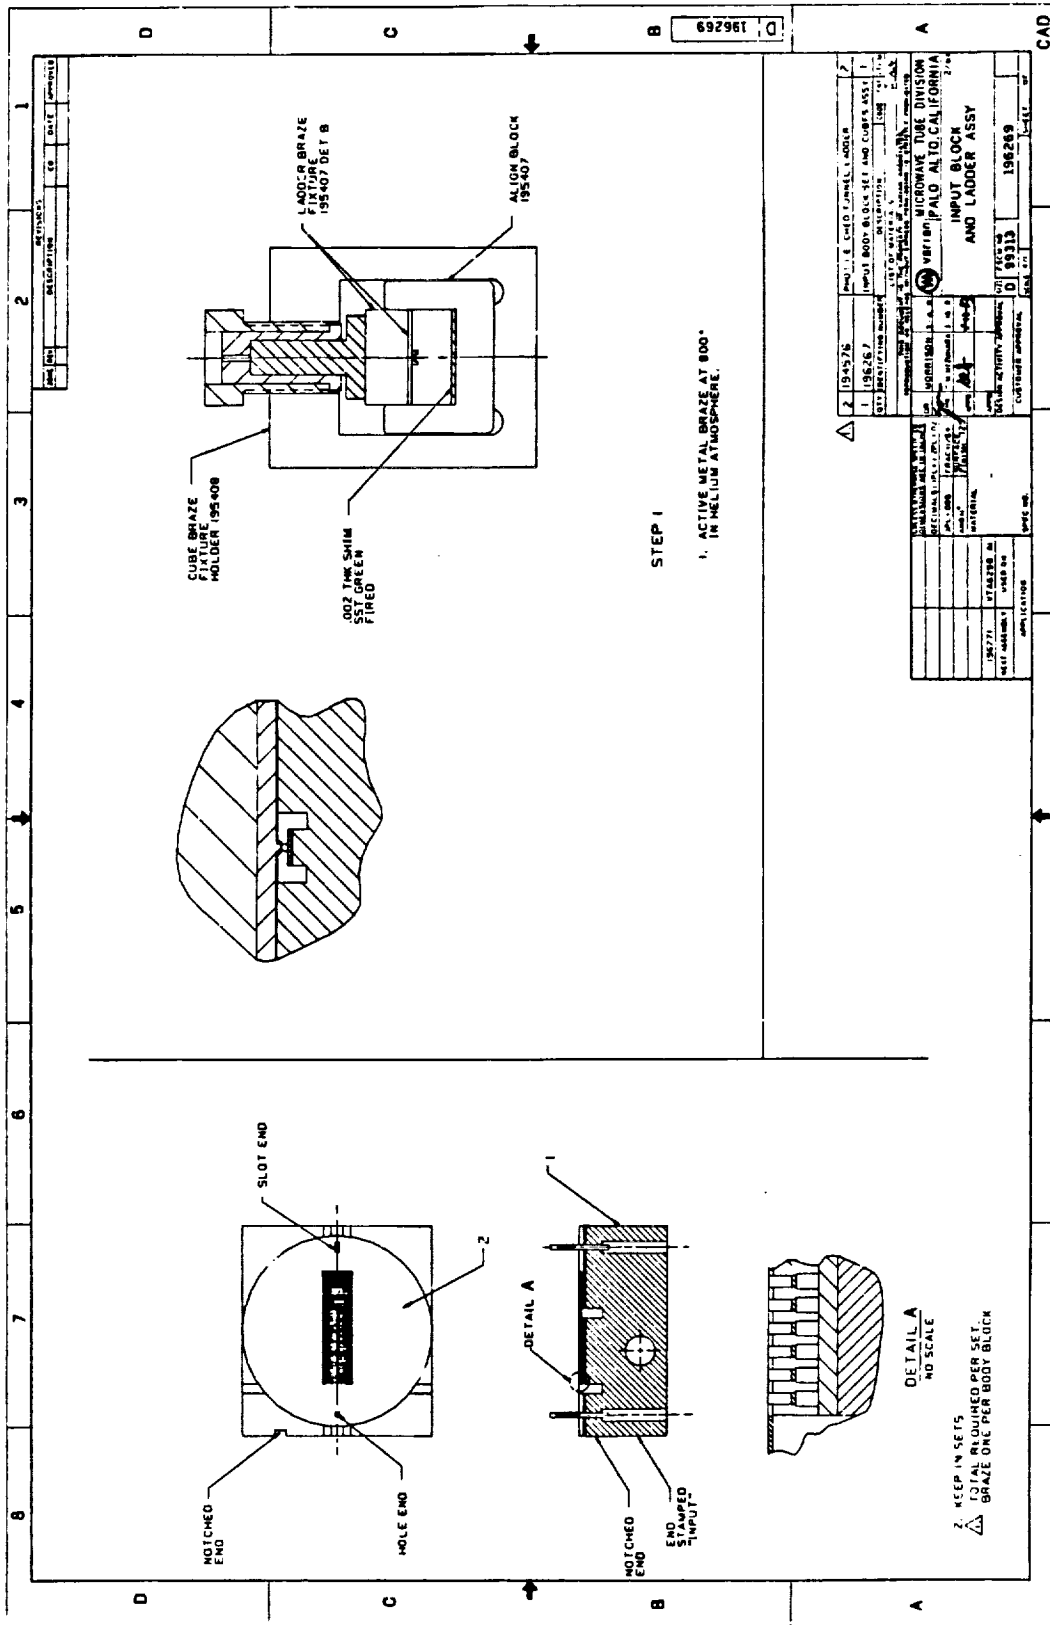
ASSEMBLY PROCEDURE THROUGH MATING OF THE TWO FINAL MACHINED HALVES.
